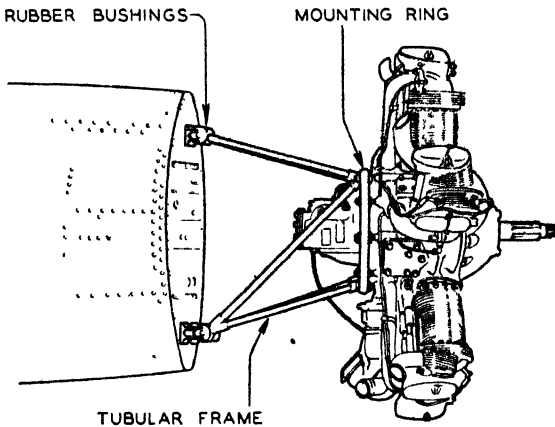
RADIAL ENGINE MOUNTING INVESTIGATION
